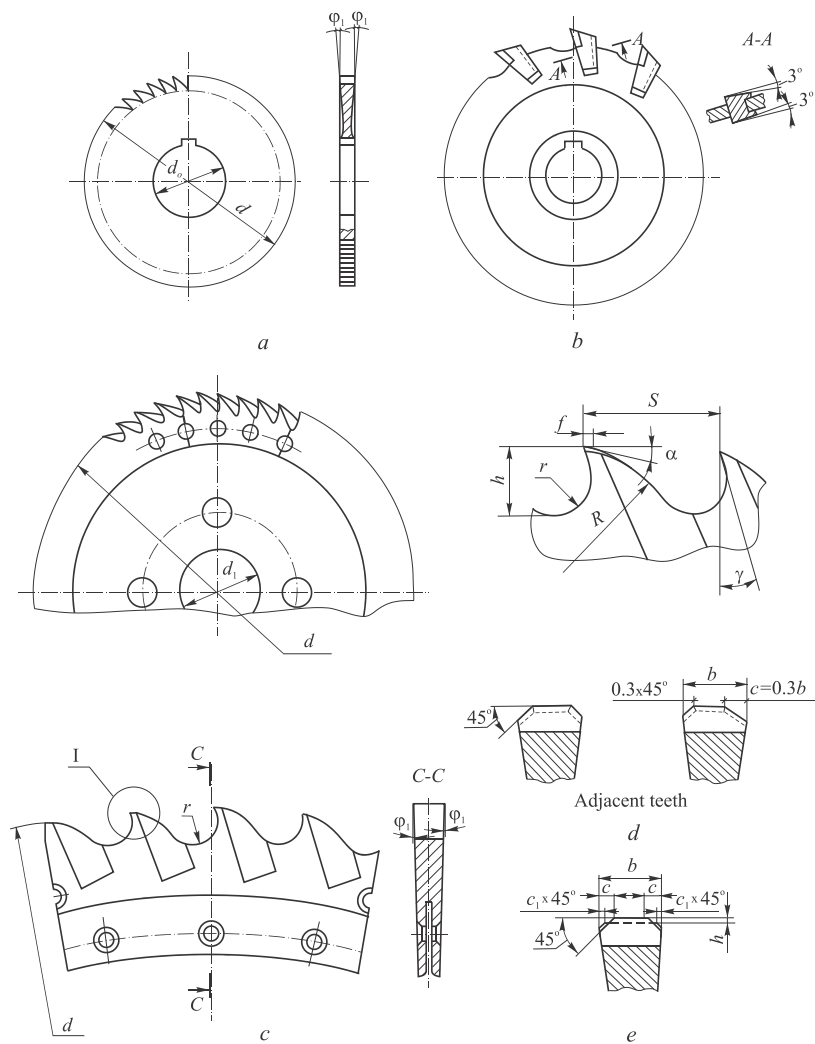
Slot and cut-off cutters: (a) solid slot cutter (slitting) and cut-off cutter; (b) inserted slot cutter; (c) segmented cutter; (d) and (e) teeth form
